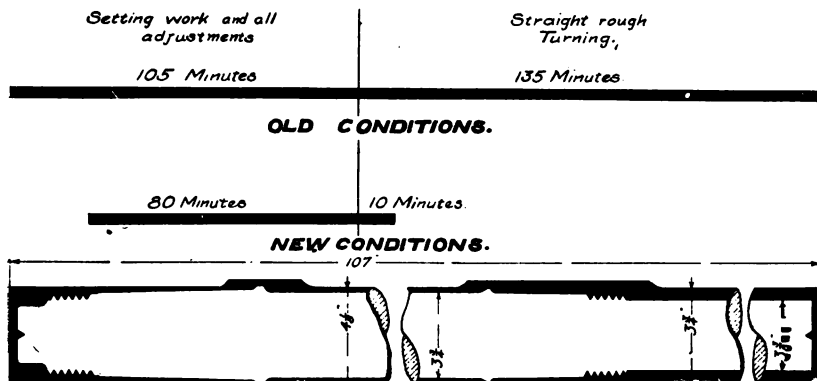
SECTION OF EXTENDED PISTON ROD SHOWING METAL REMOVED (IN BLACK) FROM ROUGH FORGING, AND TIME TAKEN FOR ALL OPERATIONS UNDER BOTH OLD AND NEW CONDITIONS.
